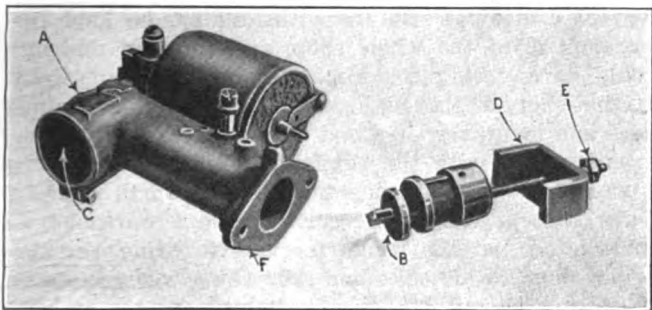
TOOL FOR REMOVING VENTURI TUBE FROM CARBURETOR
